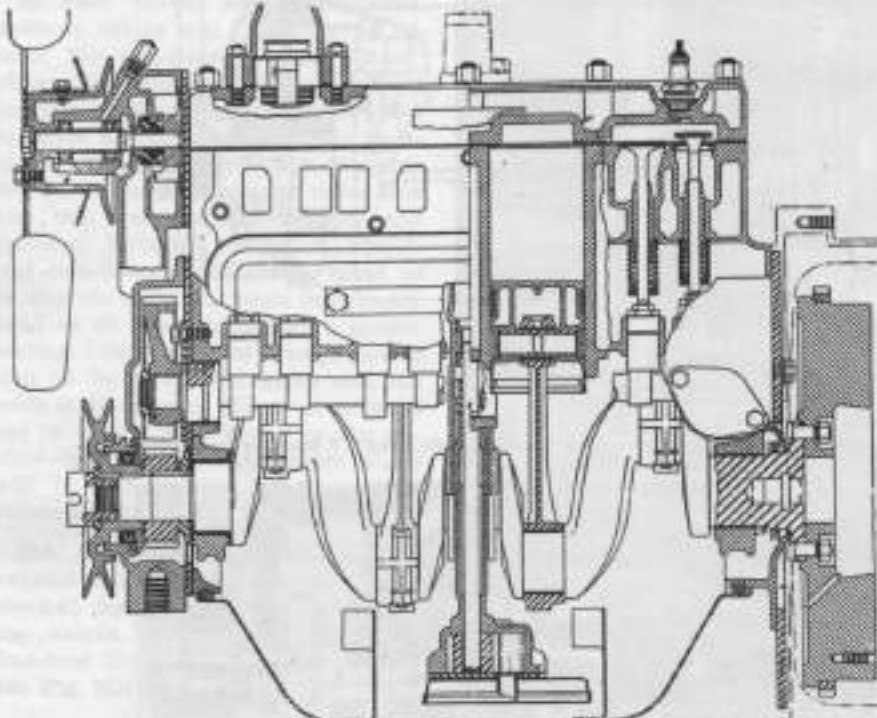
A—Continental F124-F140 and F162 engine cross section.
